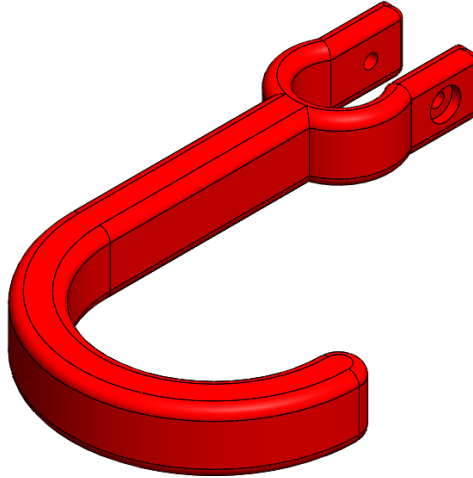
CAD design of the first fingerless door handle called “J-hook”
